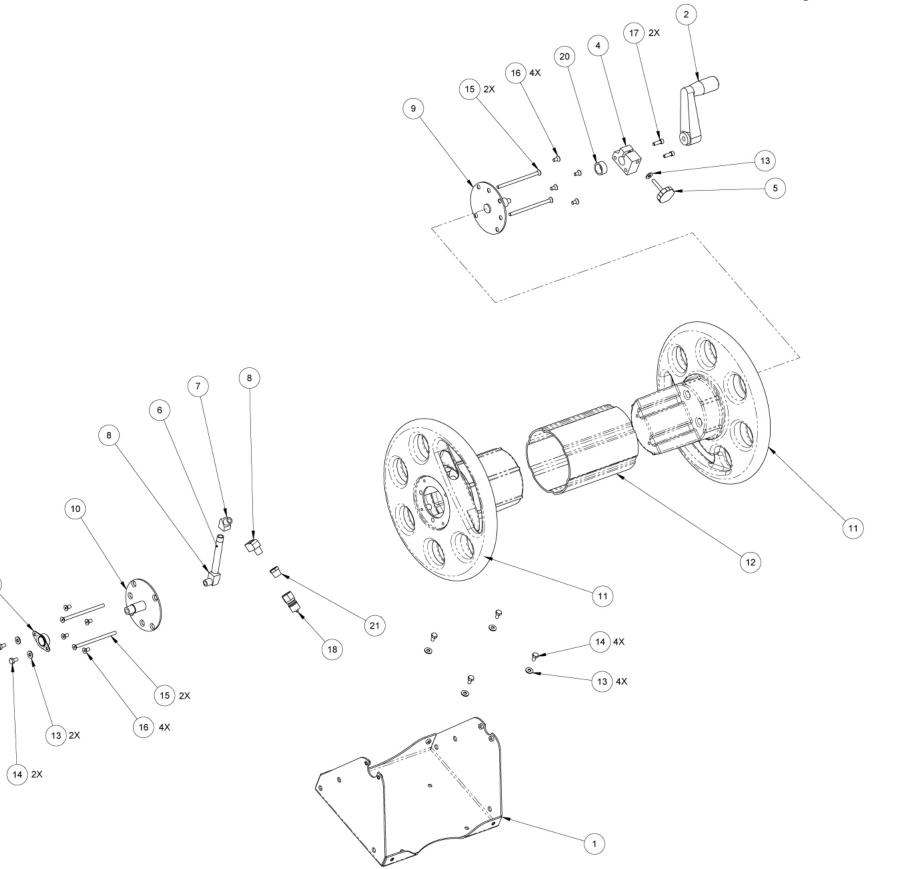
14" (35.6-cm) Diameter 1st or 3rd Garden Hose Reel Assembly - Parts View 7583 Rev. A
